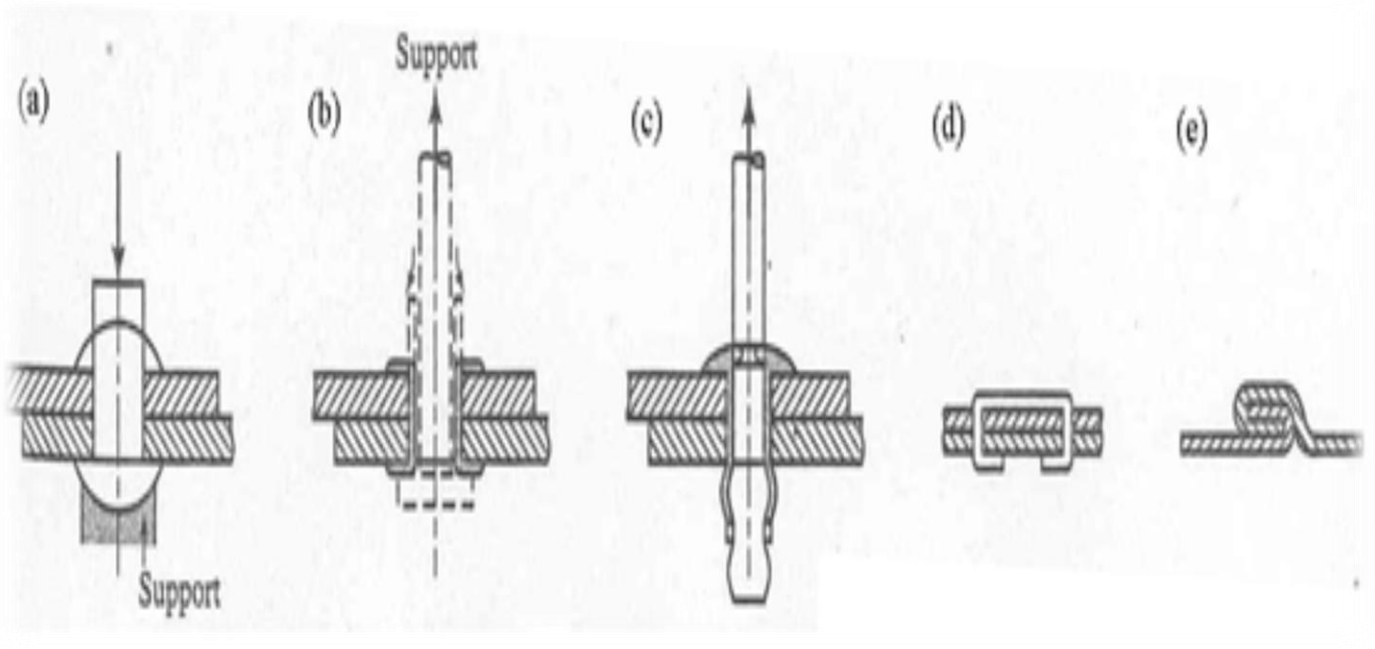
Schematic presentation of five mechanical joints: (a) rivet, (b) tubular rivet (c) blind rivet, (d) staple, (e) seam
